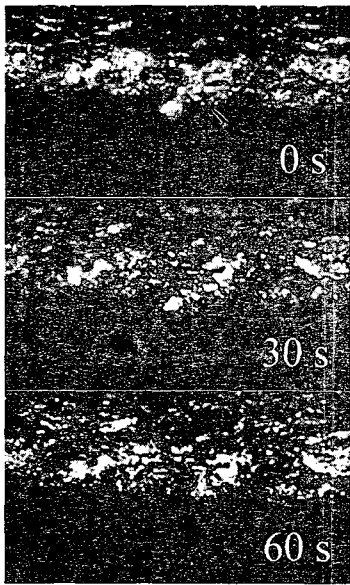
Removal of micro burr which placed in edge of work piece after each machining time.(30 seconds.)
